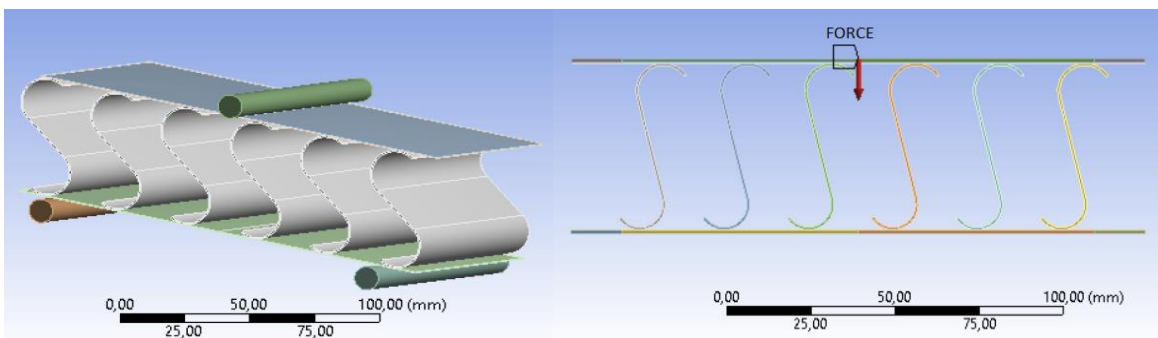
S-core dimension selected for R10mm and sheet dimensions before and after bending
